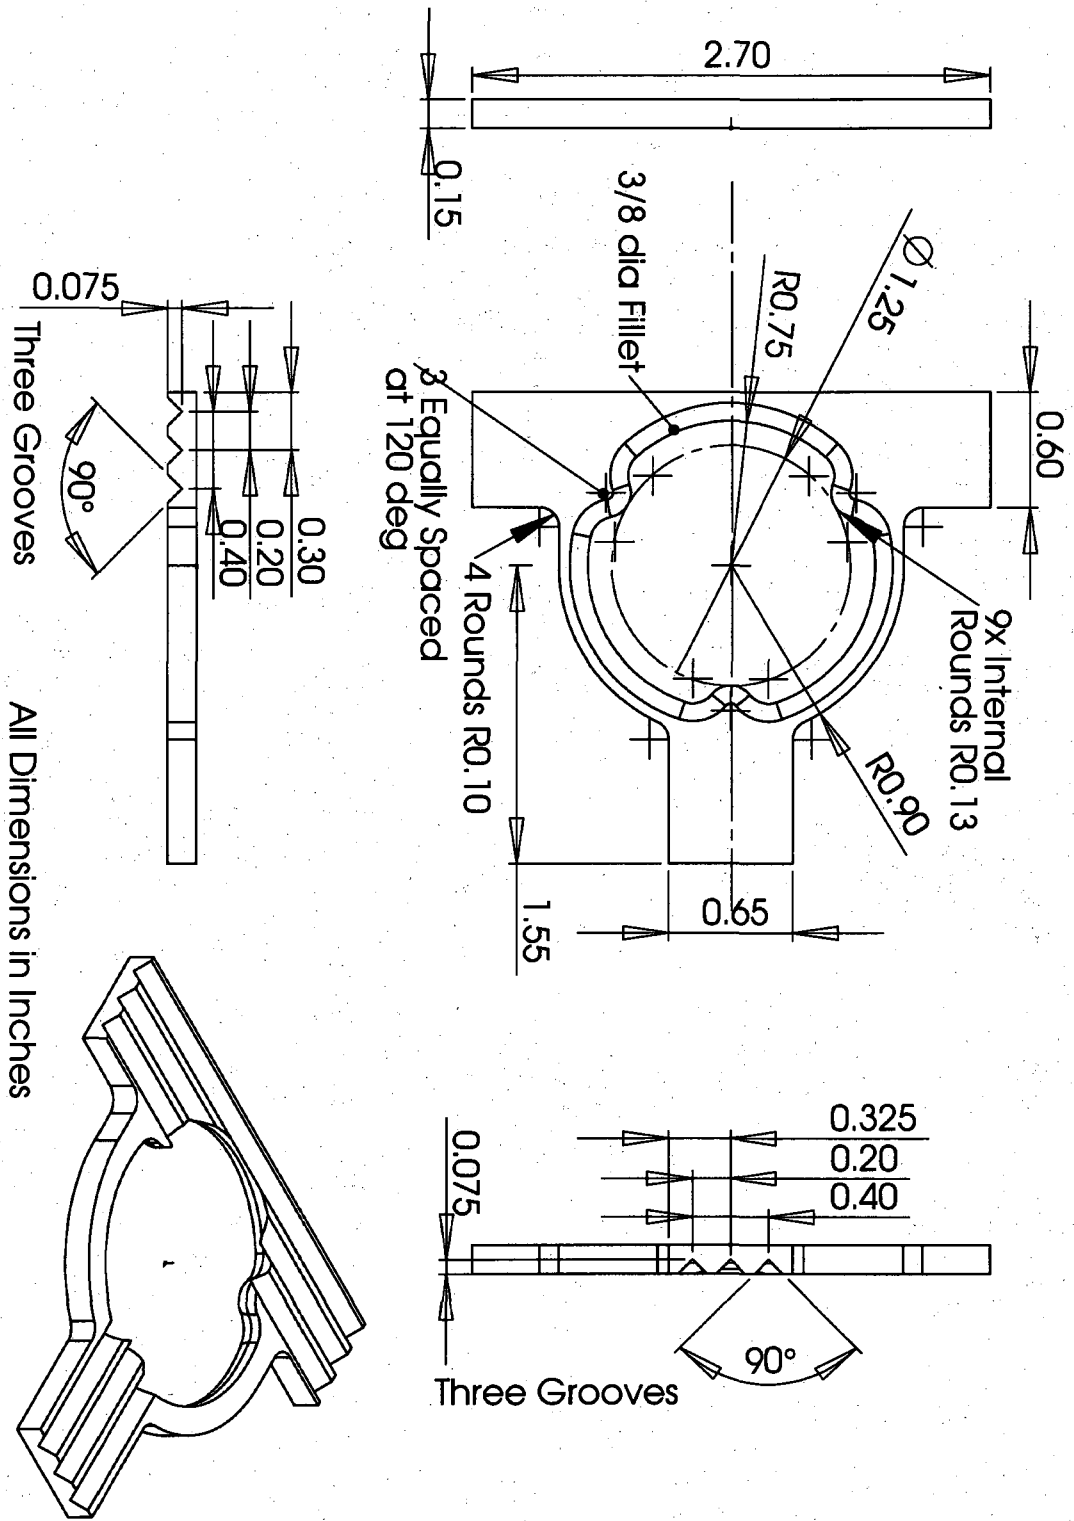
Mechanical Drawing: Sphere mounting fixture.
